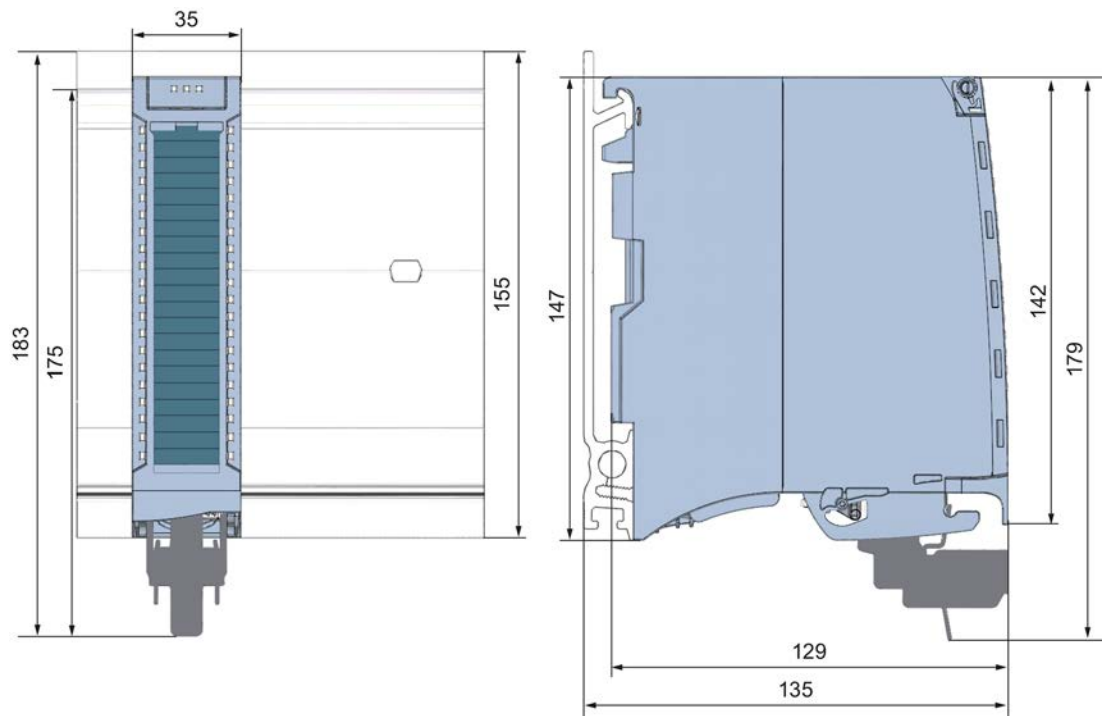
Dimensional drawing of the TM Count 2x24V technology module
